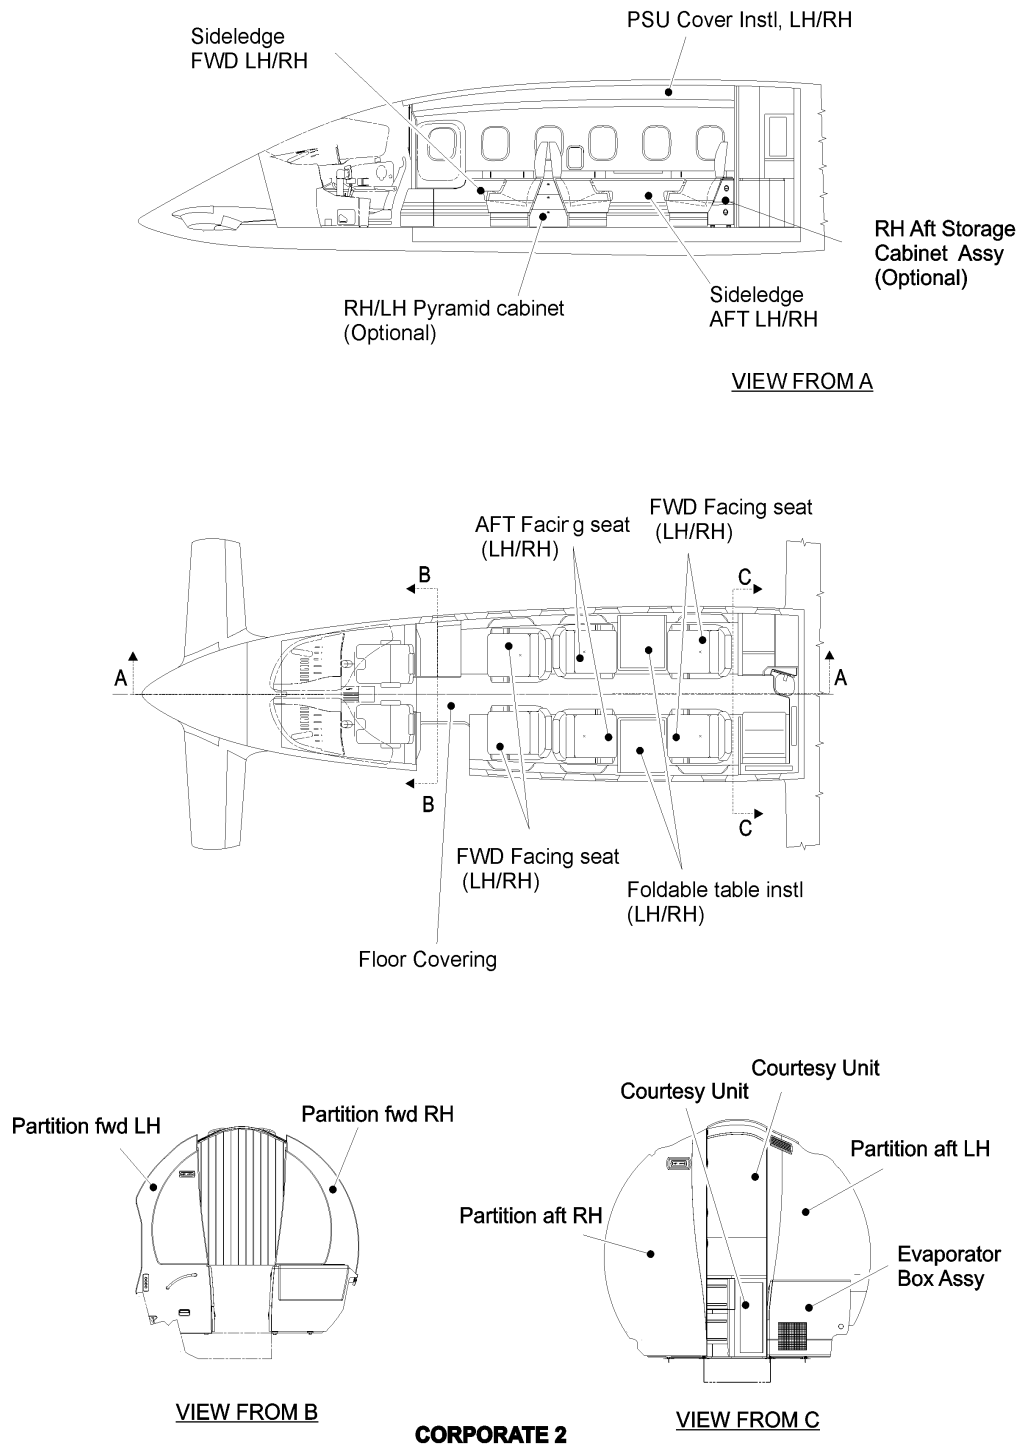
Corporate 2 to Corporate 3 - Reconfiguration (Sheet 1 of 2)
